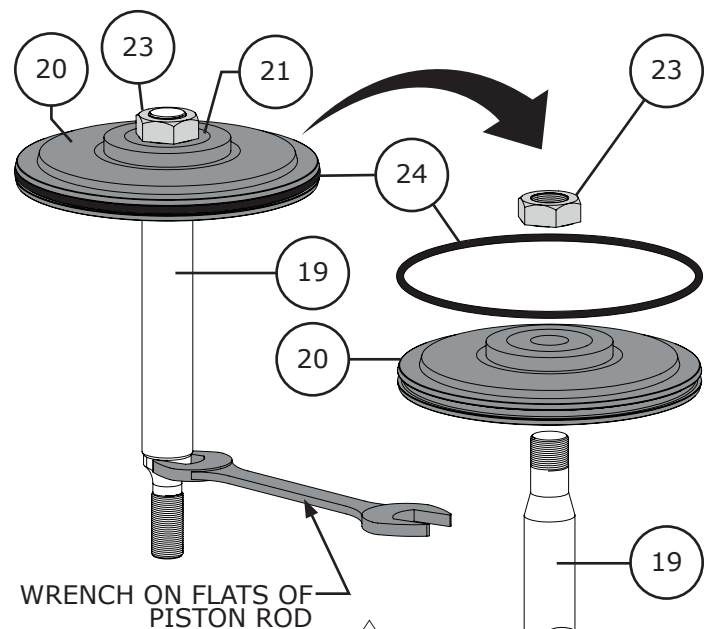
Piston Rod Disassembly (Size 113 & 154)
